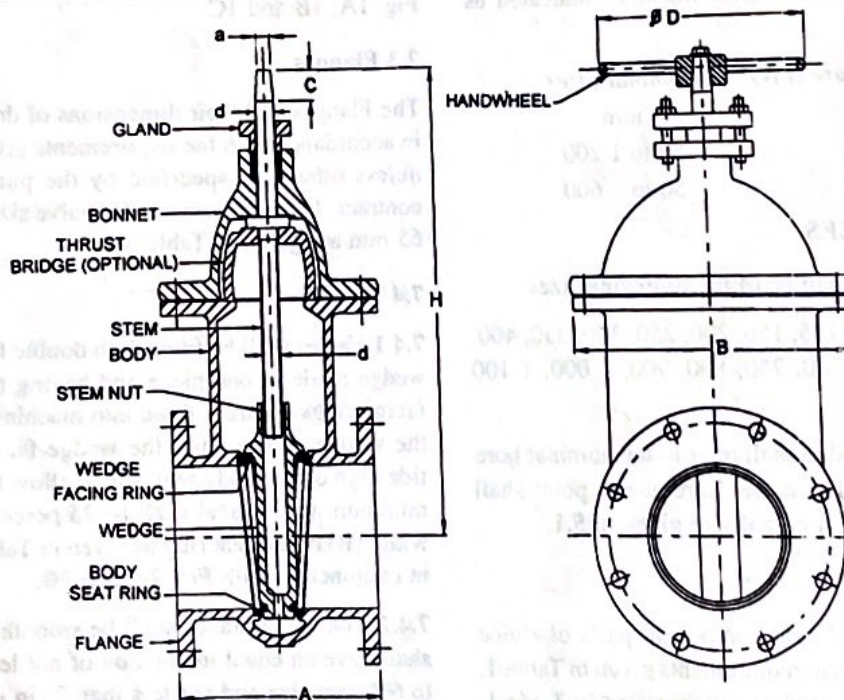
A TYPICAL SKETCH OF A SLUICE VALVE FOR SIZE 150 mm ϕ WITH THRUST PLATE
